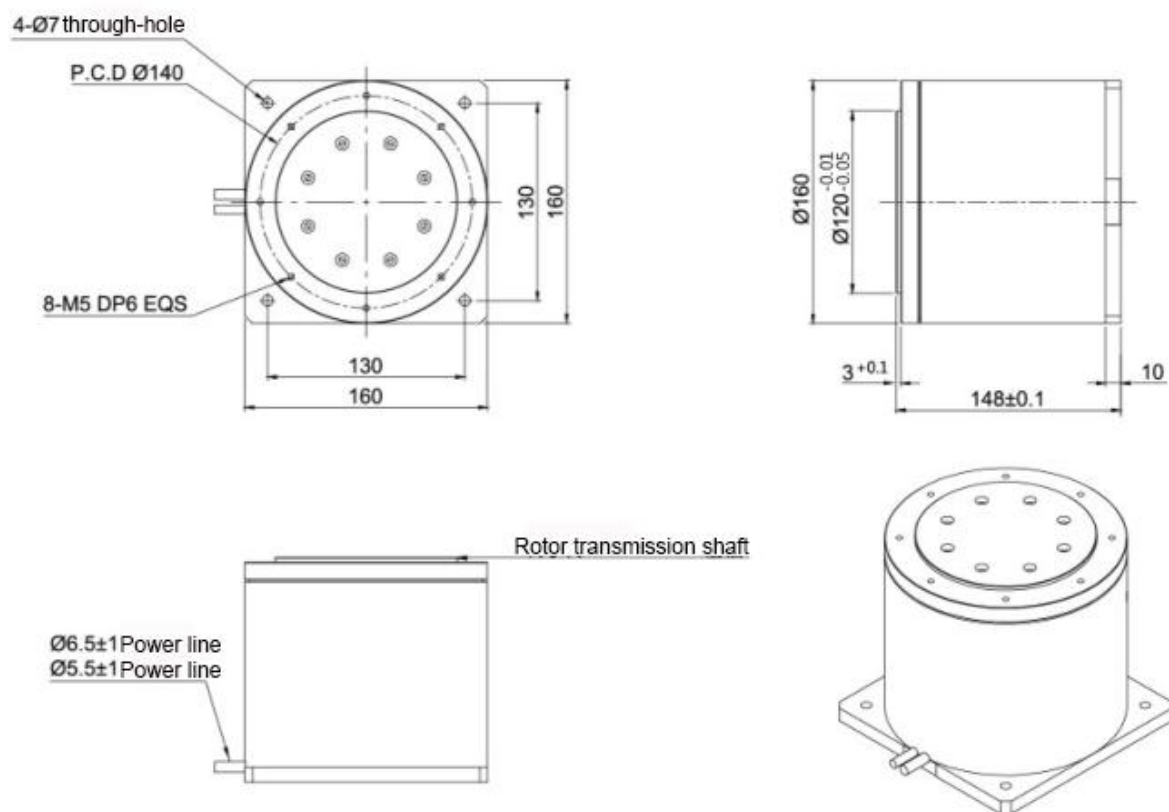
Outline dimensional drawing of WZCR-D160S-148 motor
